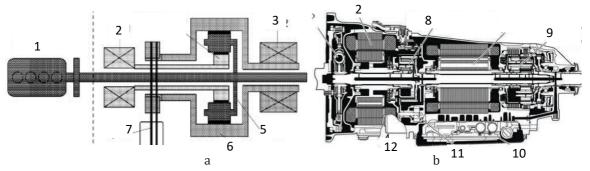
Hybrid power plant with two electric machines: a – kinematic diagram of front axle drive; b – design of electromechanical transmission GS450h with rear axle drive.
